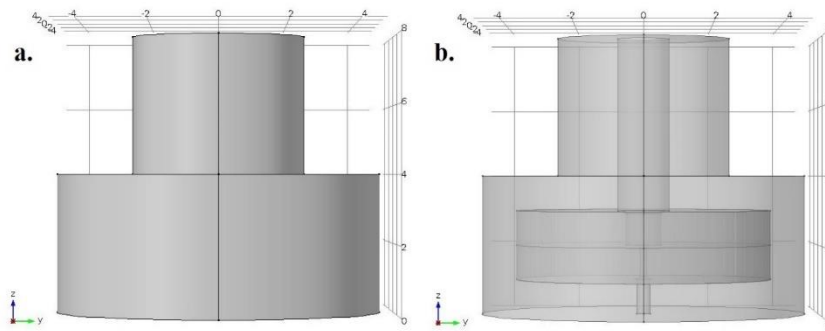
Schematic illustrations of front view of piston lower end type 2, (a. solid view, b. transparent view)
